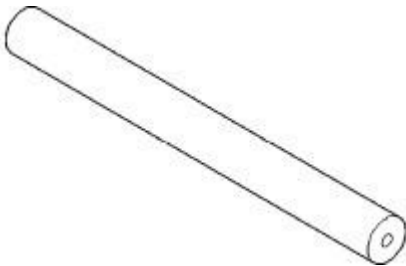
Vibration Damper Remover Insert 9020 - Crank Sprocket Remover Insert C4685-C2
